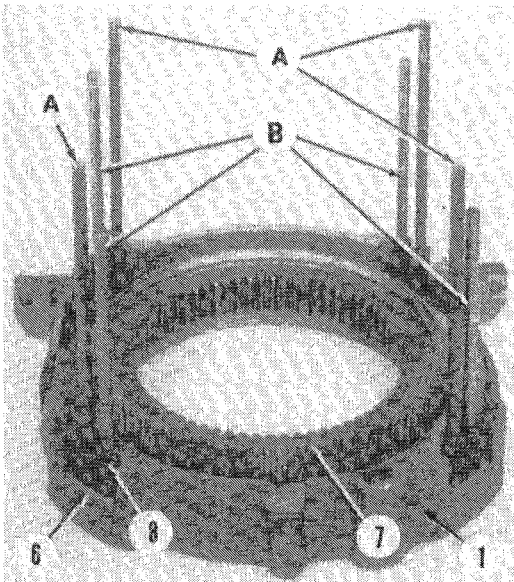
Install dowels (A and B) into holes in B1 brake housing as shown when reassembling brake packs. It will be necessary to fabricate four dowels for use on Models 4050, 4250, 4650 and 4850. Eight fabricated dowels are required for Model 4450.
